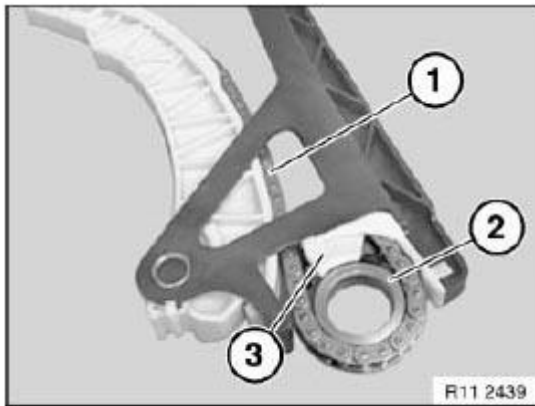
Identifying Timing Chain, Sprocket Wheel And Chain Guide
